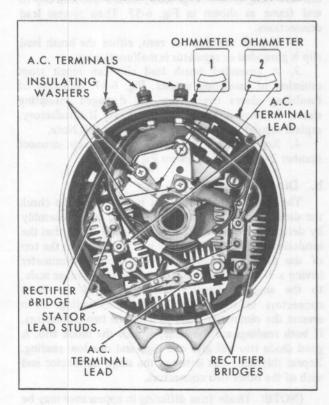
Slip Ring End Frame (With Heavy Duty Generator)
